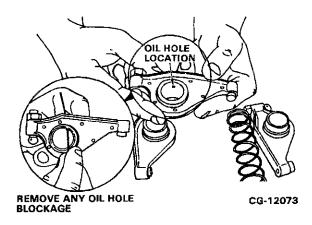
Inspect Rocker Arm Oil Hole for Blockage
